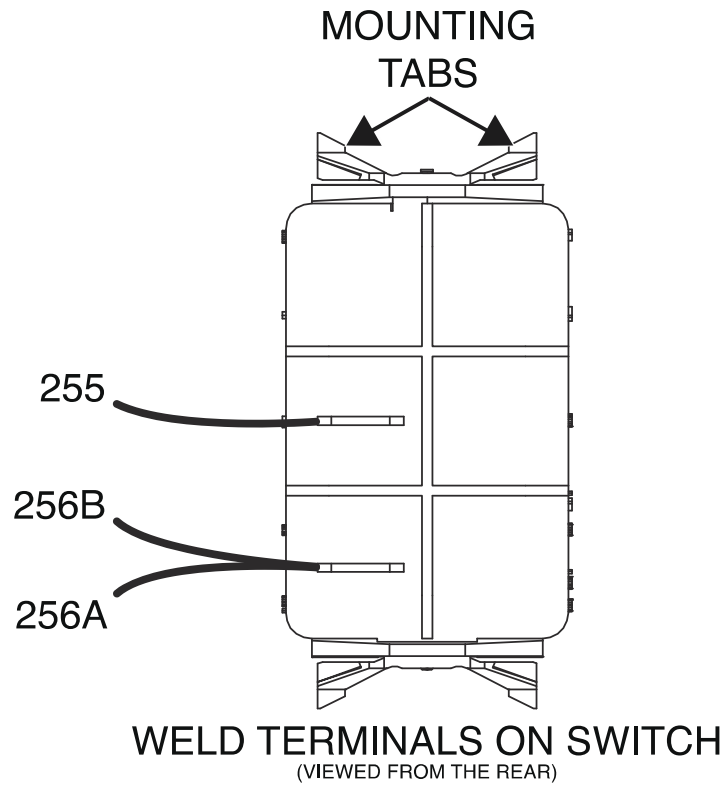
Weld terminals ON switch leads and mounting tabs location
